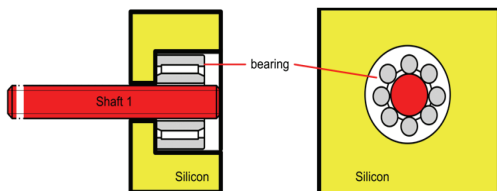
Operating mechanism of hinge part consisted cylindrical roller bearing and silicon cap
